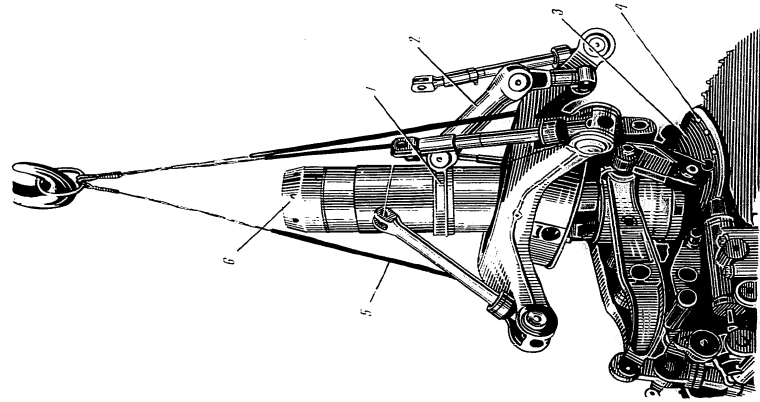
INSTALLING SWASHPLATE ON MAIN GEAR BOX. 1 - swashplate guide ring; 2 - swashplate guide; 3 - plate for attaching swashplate to main gear box; 4 - nuts for attaching plate; 5 - main gear box studs; 6 - 6.817 106 studs for lifting swashplate; 6 - 107-15 120 applied for protecting thread on main gear box shaft.
